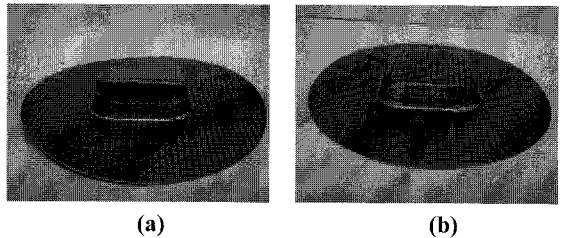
Drawing failures for set #3 (a) after 10mm drawing at 200°C, (b) after 10mm drawing at 250°C
